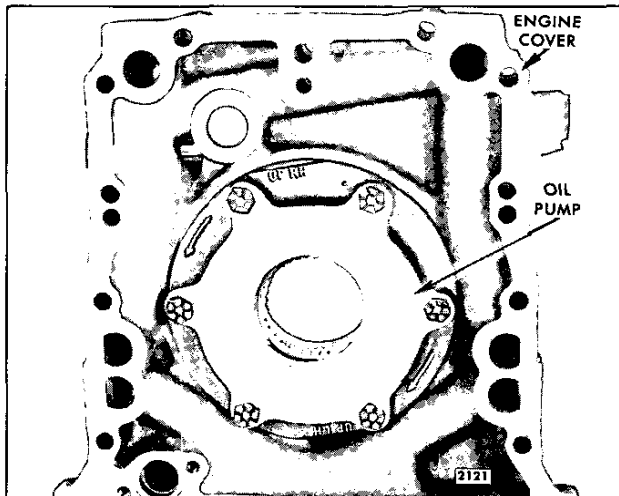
Typical Right-Hand Rotation Oil Pump Mounting
